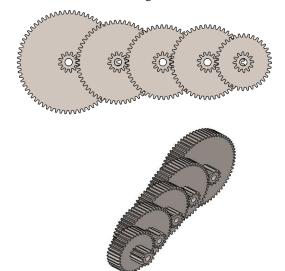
Front and reverse isometric views of a typical compound spur gear arrangement.
